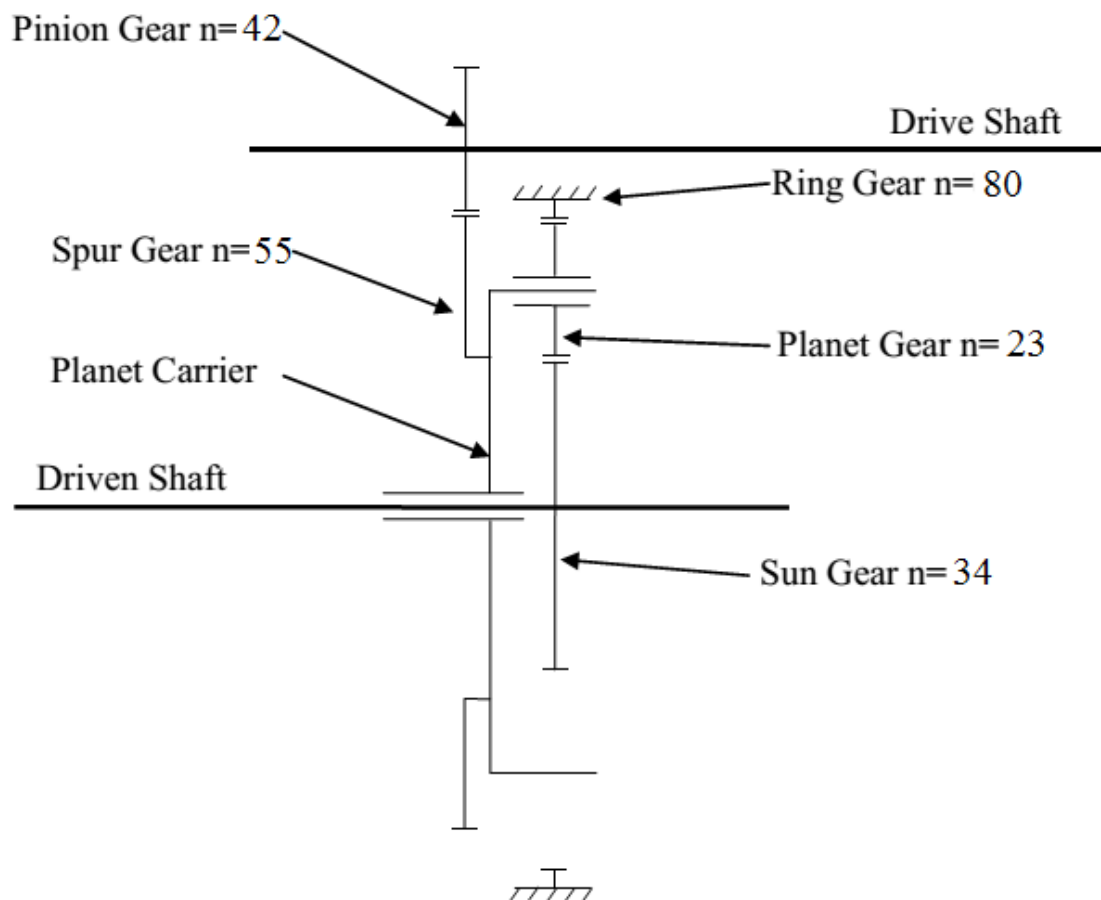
The UNSW test rig gearbox, illustrating the parallel stage and the slip ring.
